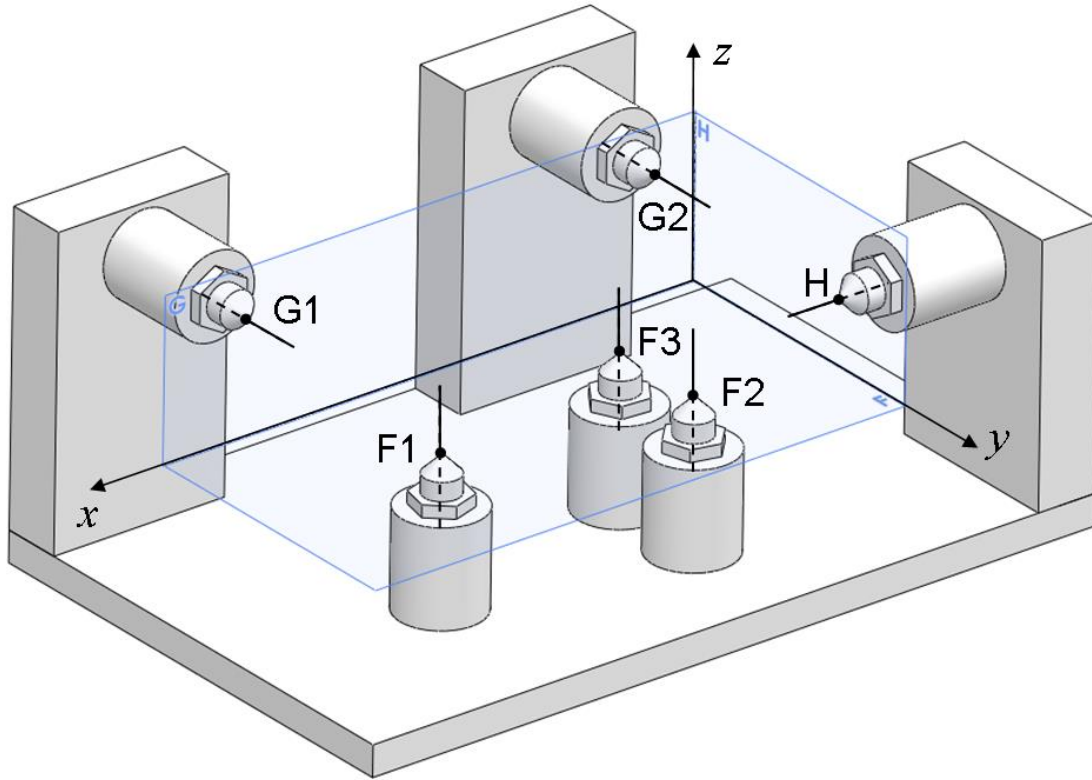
An Adaptive Fixture for Manipulating TBM Parts
